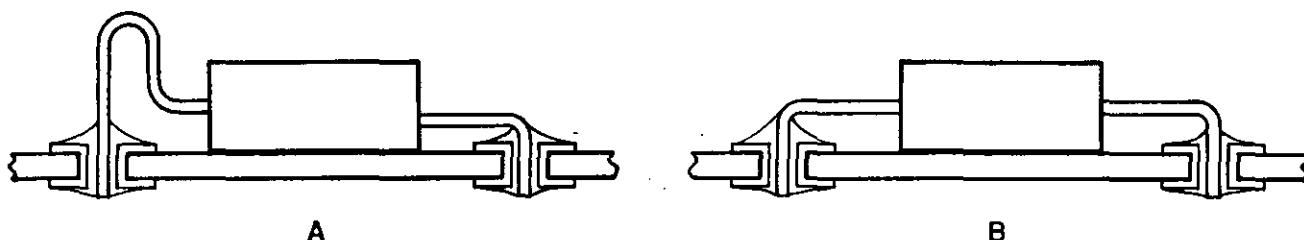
Solder in the lead bend radius (see 4.18.5.1).
